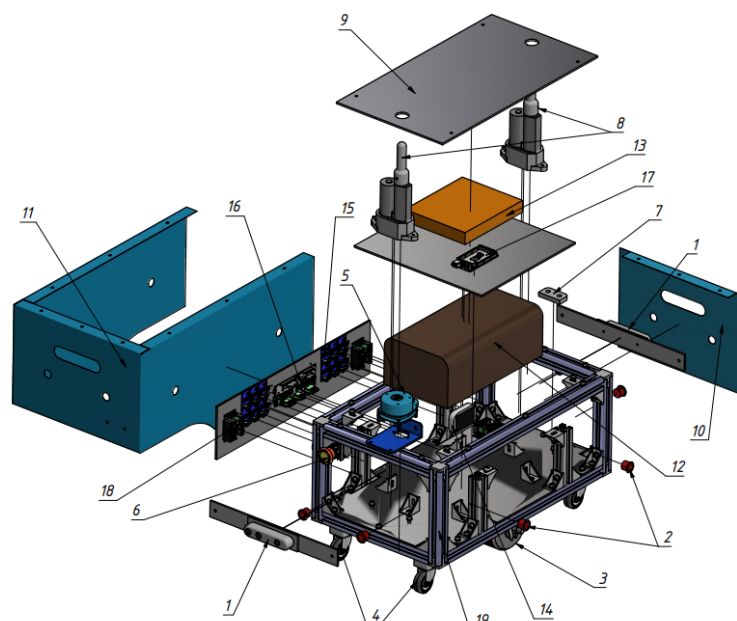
Detailed diagram of the transport robot devices: 1- depth camera; 2- ultrasonic rangefinders; 3- driving wheels; 4- rotary wheels; 5- lidar; 6- emergency button; 7 – battery pack charging contacts; 8- linear actuator with pin; 9- top cover; 10- rear cover; 11- front cover; 12- battery pack; 13- computer; 14- power supply charge display; 15- ultrasonic rangefinder board; 16- motor driver; 17- debugging board; 18- step-down converter; 19- structural aluminum profile.
